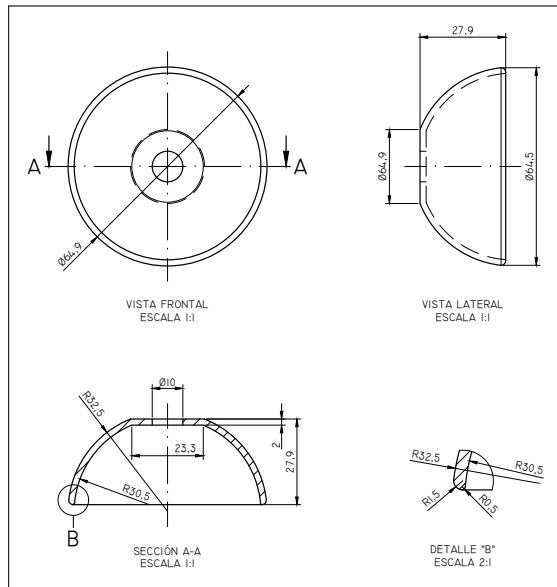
Plan, profile and elevation with dimensions of bells to be measured.
